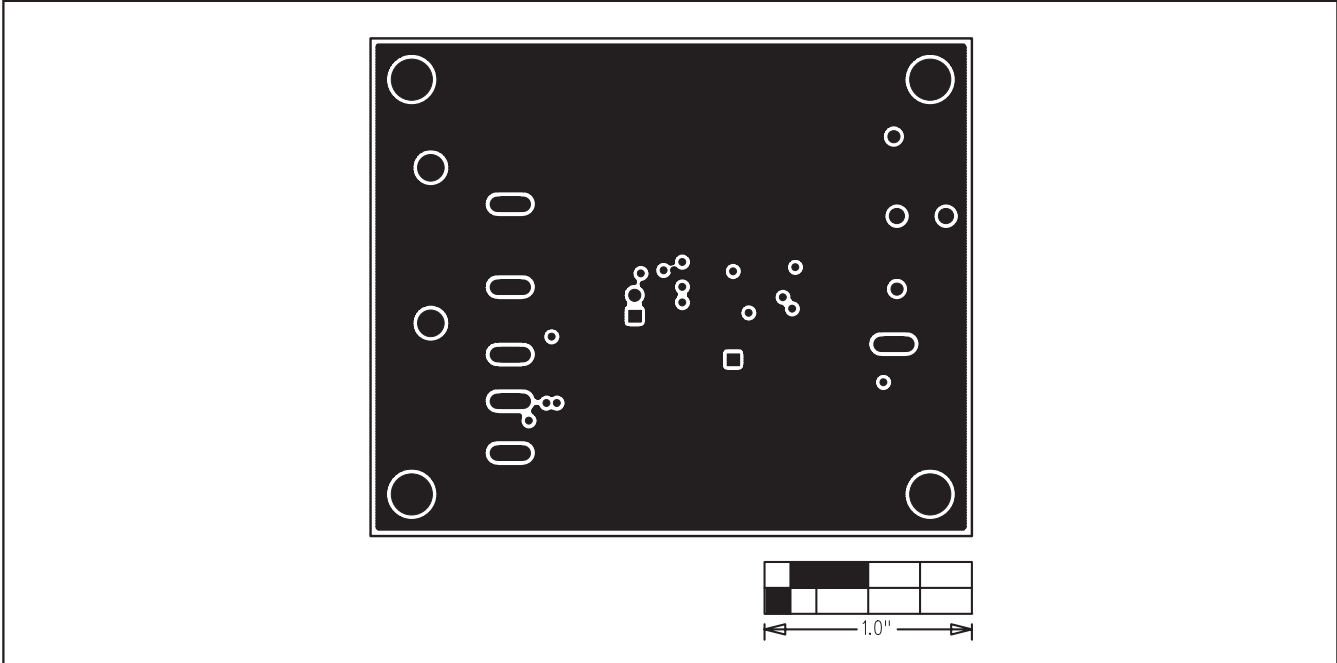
MAX13331 EV Kit PCB Layout—Internal Layer 2
